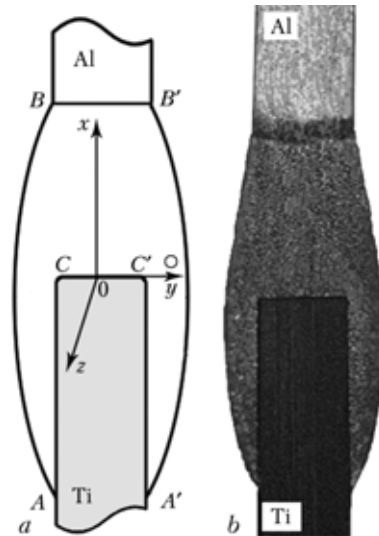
Scheme (a) and macrosection (b) of braze-welded dissimilar joint; circle shows area of investigation of degree of hot cracking risk
